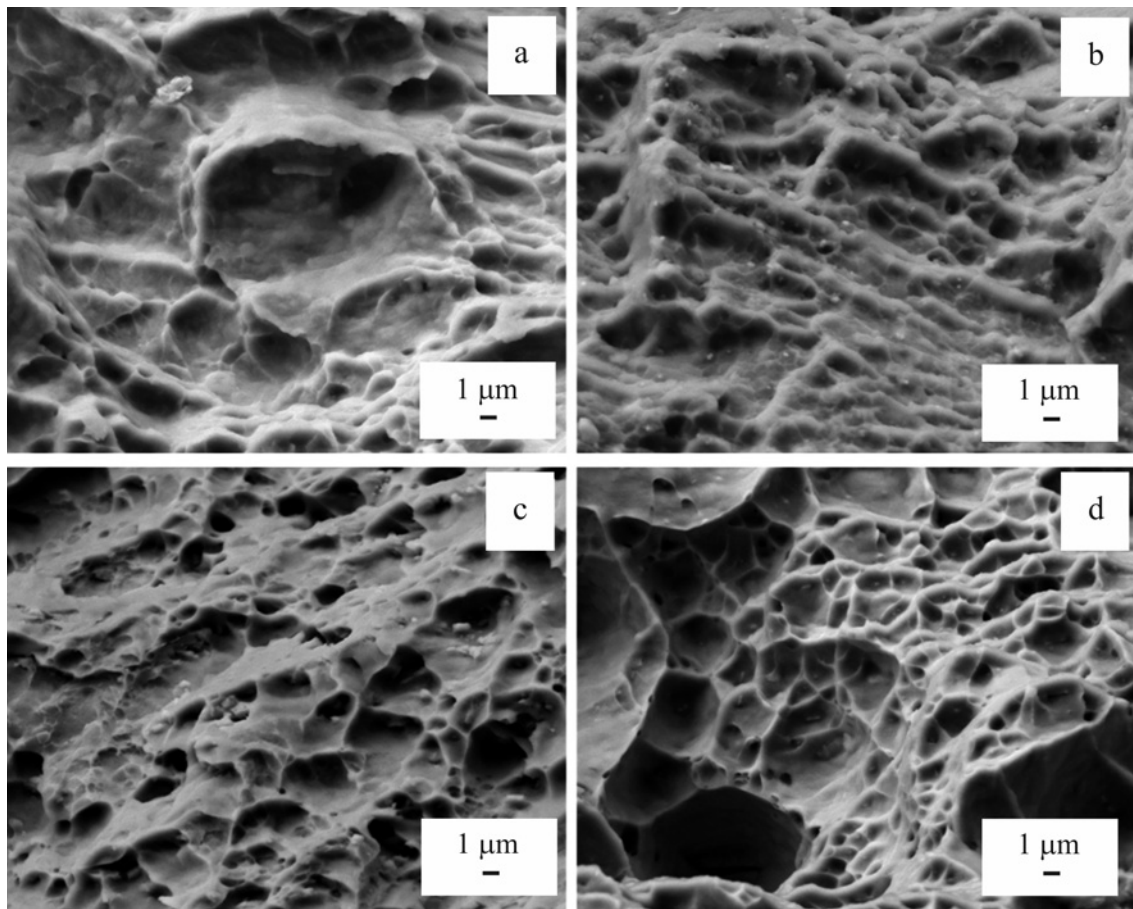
(a)–(d) fracture surfaces ductile fractures.
